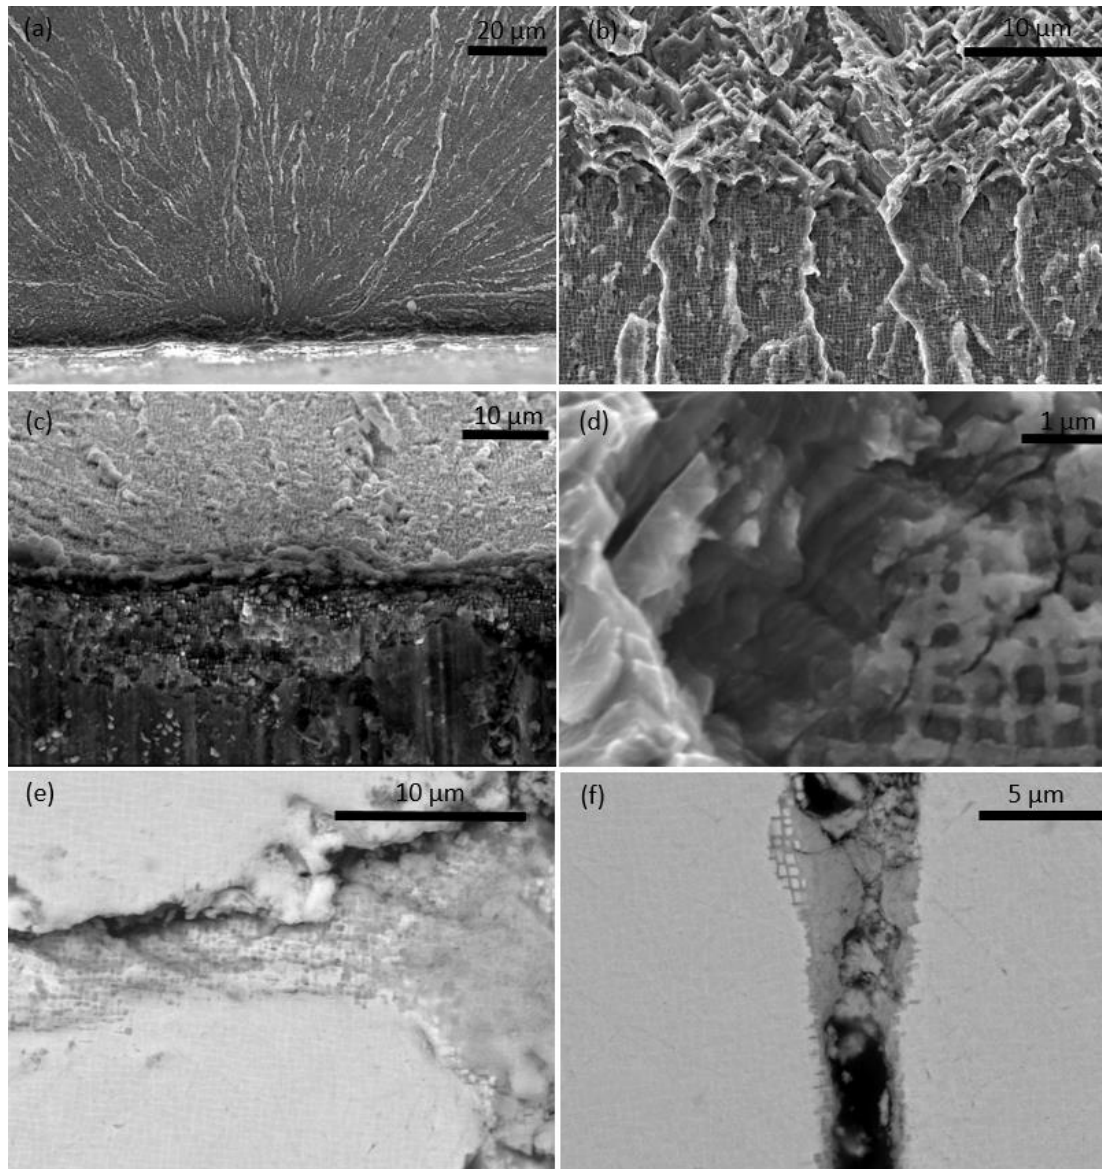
Secondary electron images of 800 MPa C-ring with a  $5 \mu\text{g}/\text{cm}^2/\text{h}$  deposition flux and a test gas of air - 300 vppm  $\text{SO}_2$  (a) 100 h fracture face showing signs of beaching marks (b) 100 h fracture face, crack tip showing attack of  $\gamma'$  (c) 100 h specimen surface showing attack of  $\gamma$  (d) 100 h high mag fracture surface at crack tip (e) 300 h corrosion attack of  $\gamma'$  precipitate (f) 500 h corrosion attack of  $\gamma$  matrix
